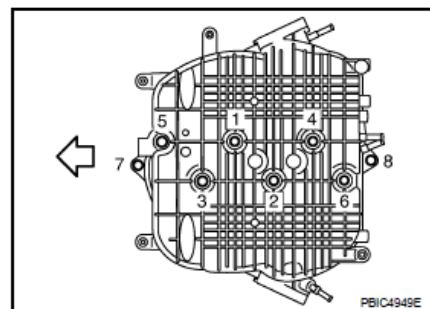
Identifying Intake Manifold Collector Mounting Bolts Tightening Sequence
